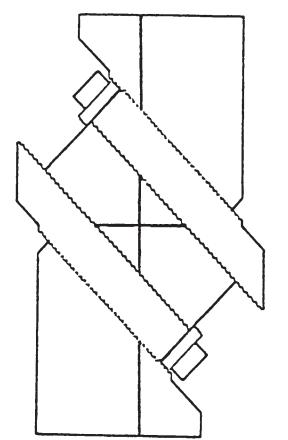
Proper Positioning of Test Specimen and Shear Jaws on Angle Supports
